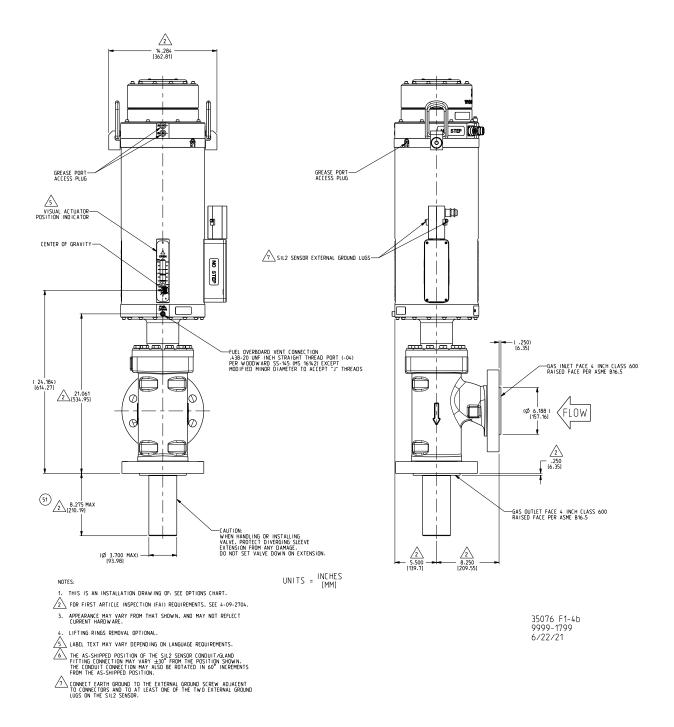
Outline Drawing (4-Inch LESV II Class 600)
